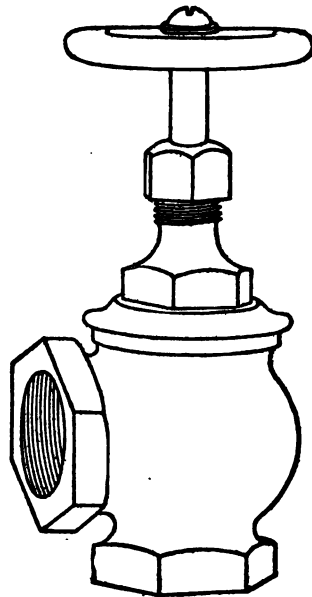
Angle Valve of Ordinary Globe Pattern.
